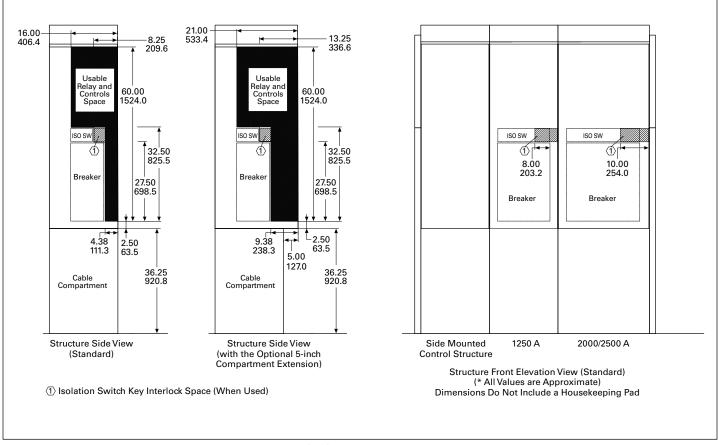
GIS Side View Control Space—Dimensions in Inches (mm)
